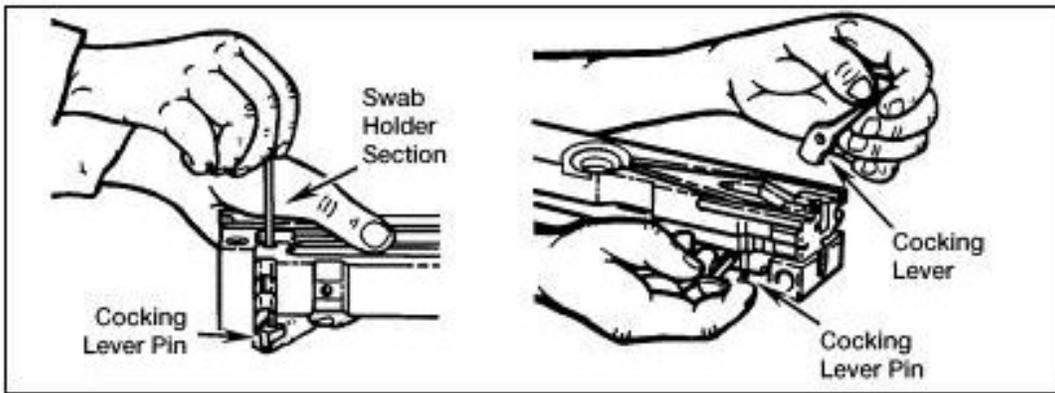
ST-1025_11 (Removal of the cocking lever pin and cocking lever)
